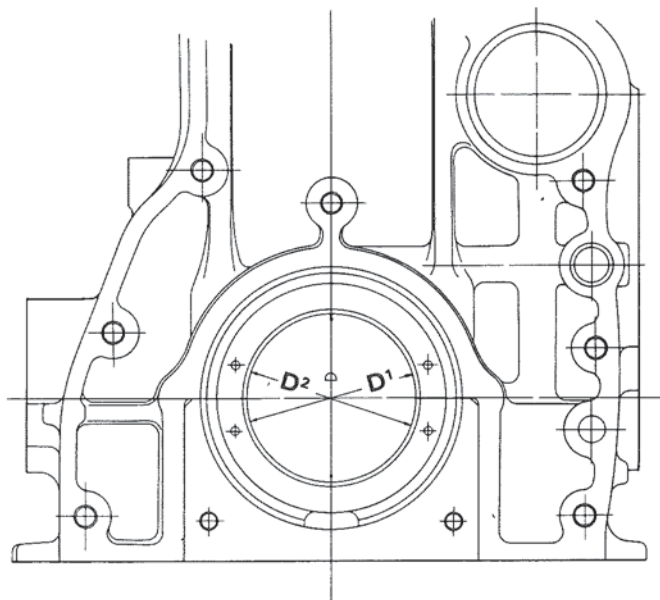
Measuring Points of Inner Diameter of Main Bearing.
